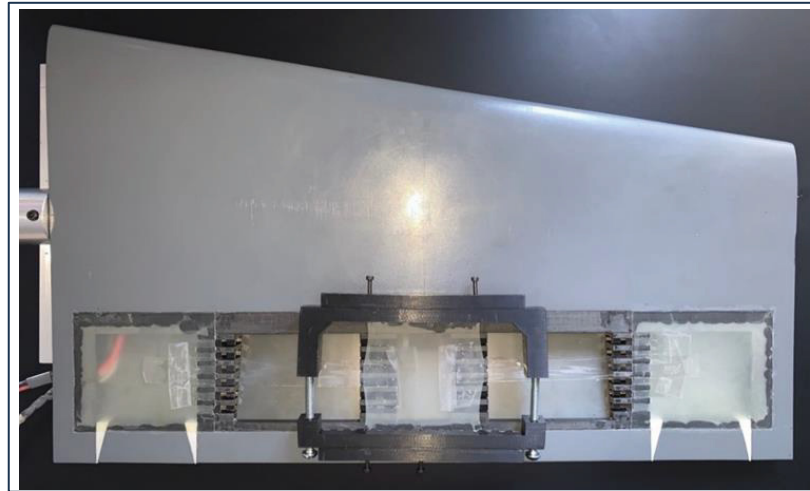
Attachment of the flexible skin on the lower surface of the SMTE flap using the pretension tool
